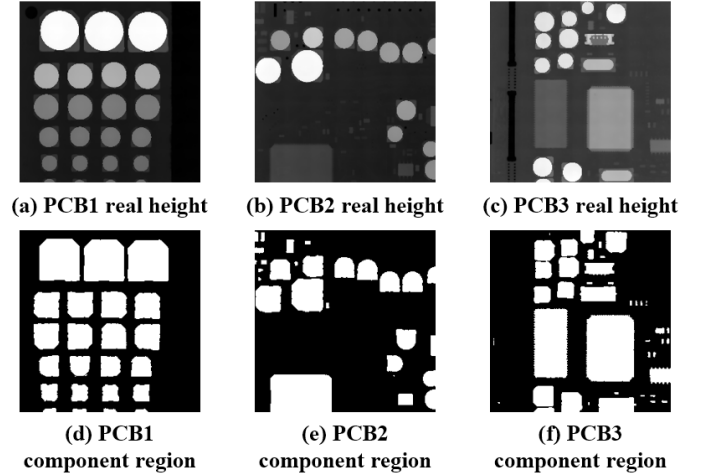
(a)-(c) real height value of PCB1, PCB2, PCB3, (d)-(f) only component region of PCB1, PCB2, PCB3, consisting of pixel 255
